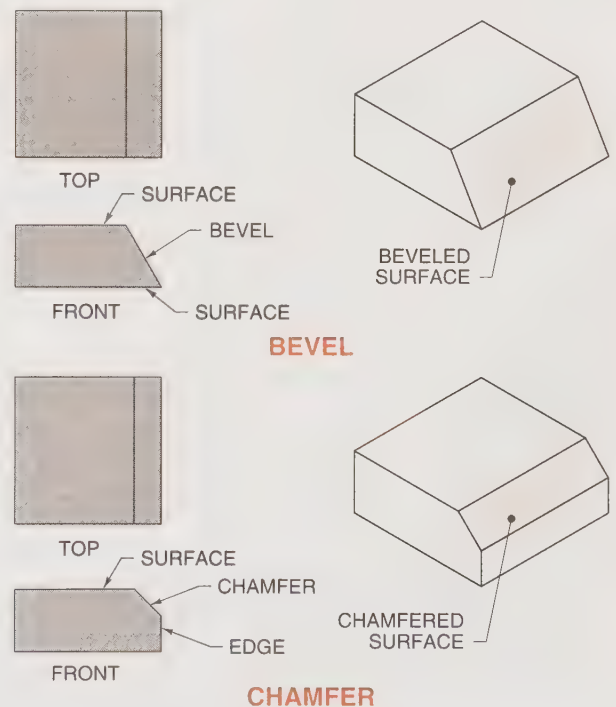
A bevel extends from surface to surface. A chamfer extends from surface to edge.
